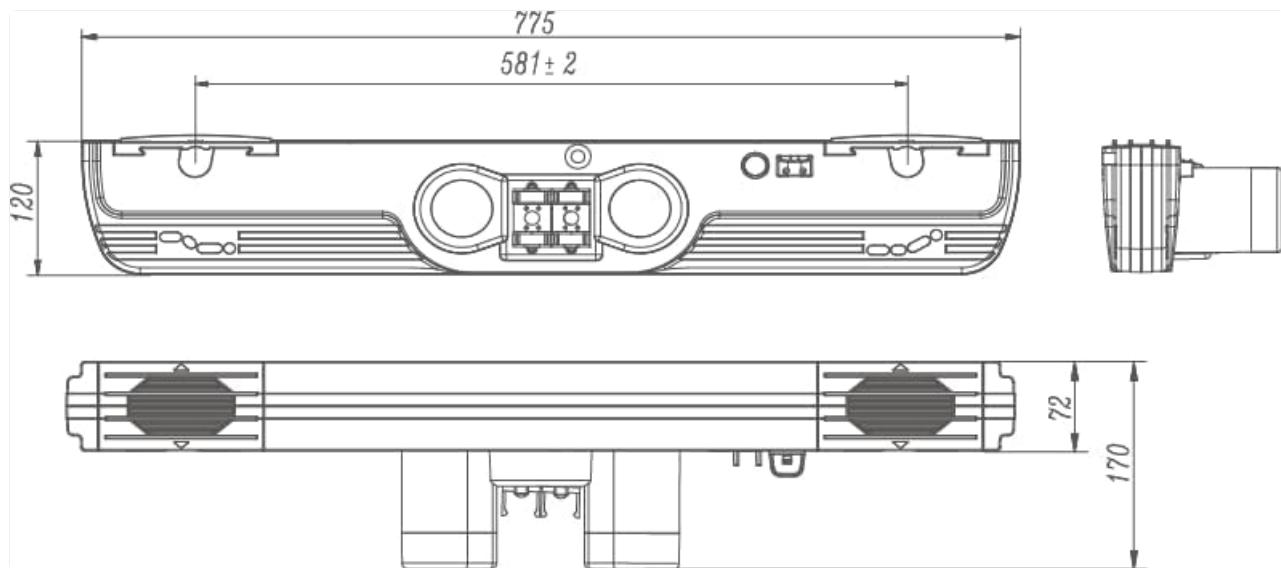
Dimensional drawing illustrating the mounting hole spacing (581 mm) and overall dimensions of the HJA3 motor.
